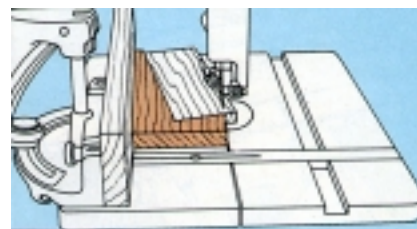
Use a fixed taper jig to cut duplicate tapers without measuring each board.
